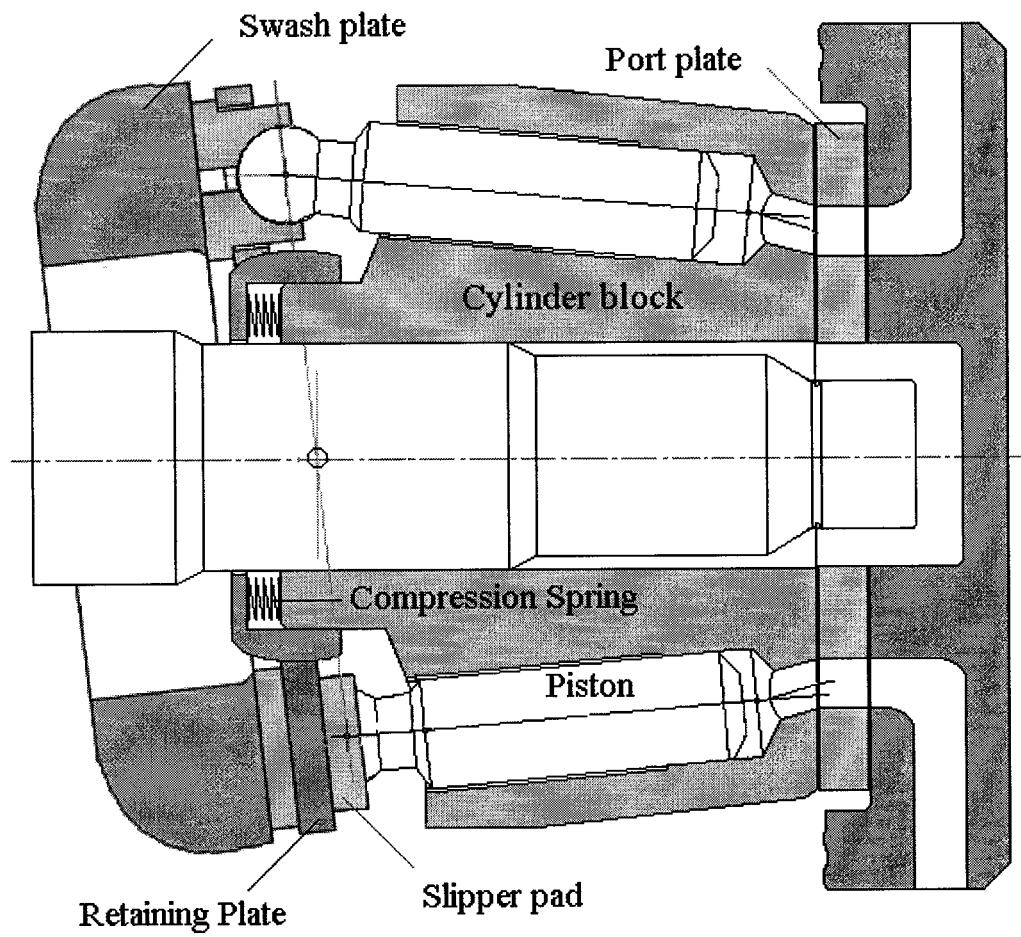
Swash plate axial piston pump with conical cylinder block
